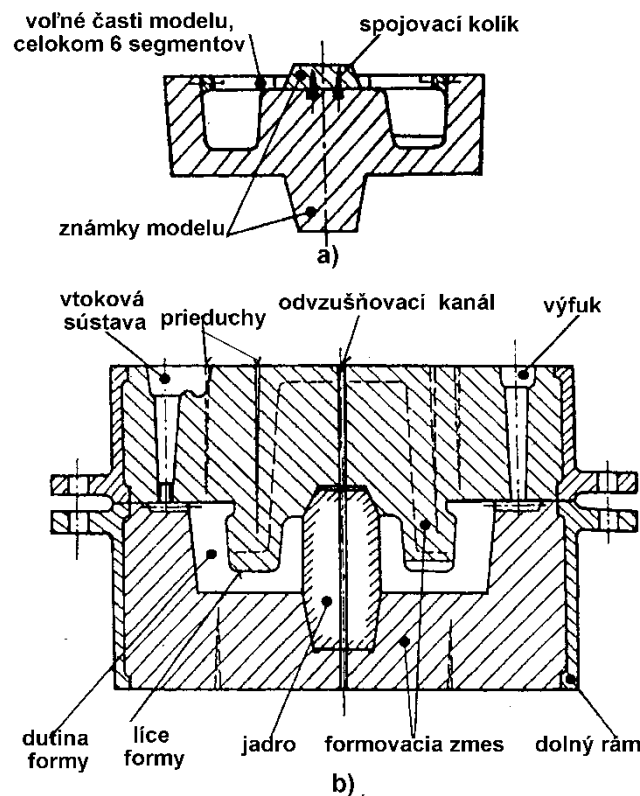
a) Sketch of split pattern, b) Sketch of mould
